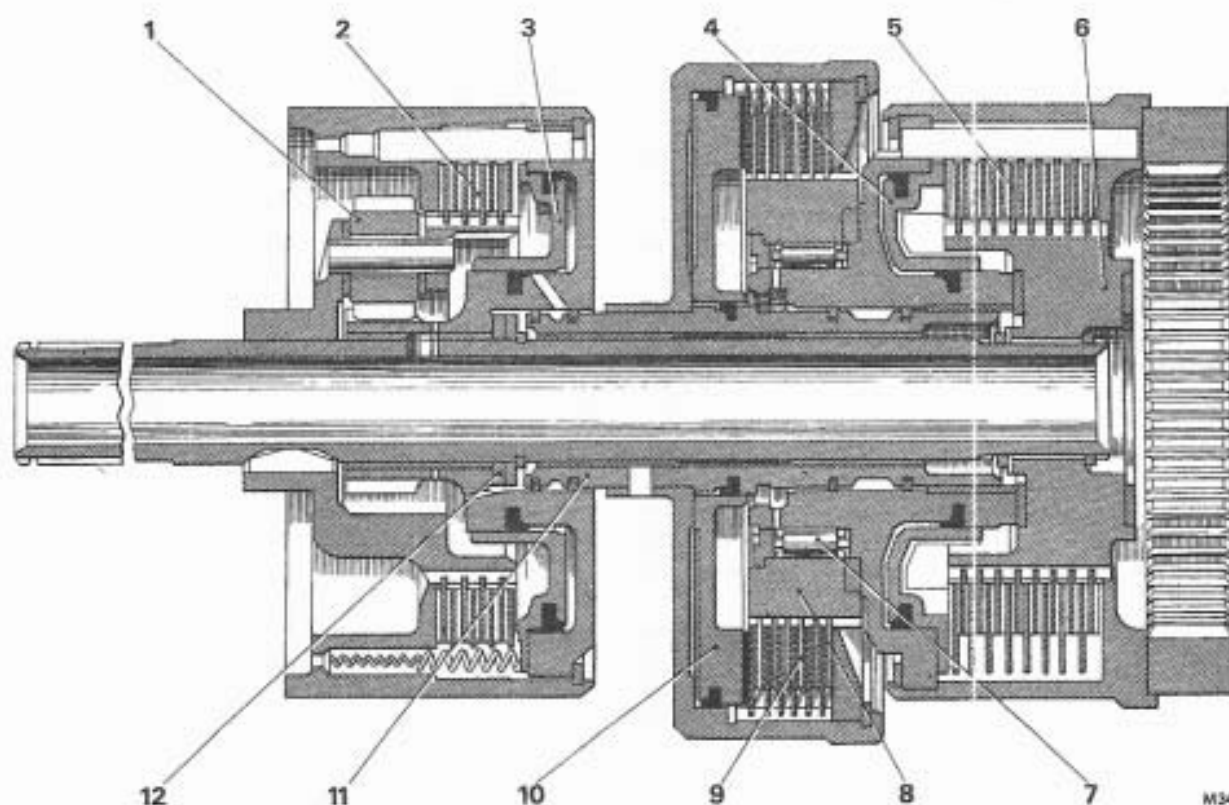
DRUM ASSEMBLIES—SECTIONED VIEW
